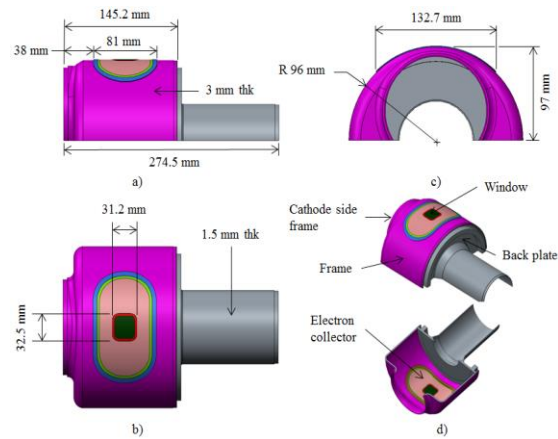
Geometric model of Base design (a) Front view, (b) Top view, (c) Side view and (d) Isometric views
